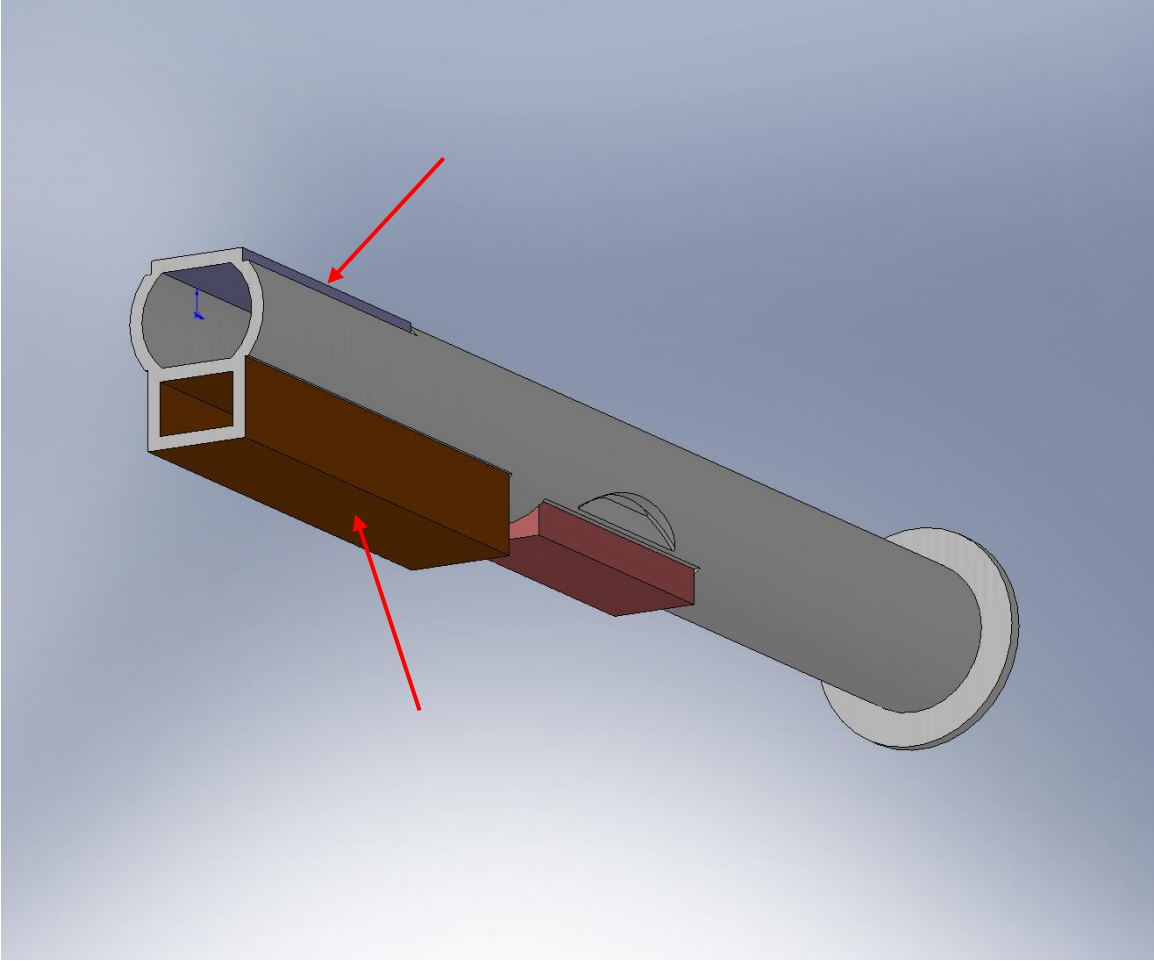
The plate on the top is 1/2"-thick steel and is included to allow clearance beneath the HAM chamber door flange. The rectangular tube welded to the bottom also has 1/2" wall thickness. This extrusion is added strictly for increased stiffness.
